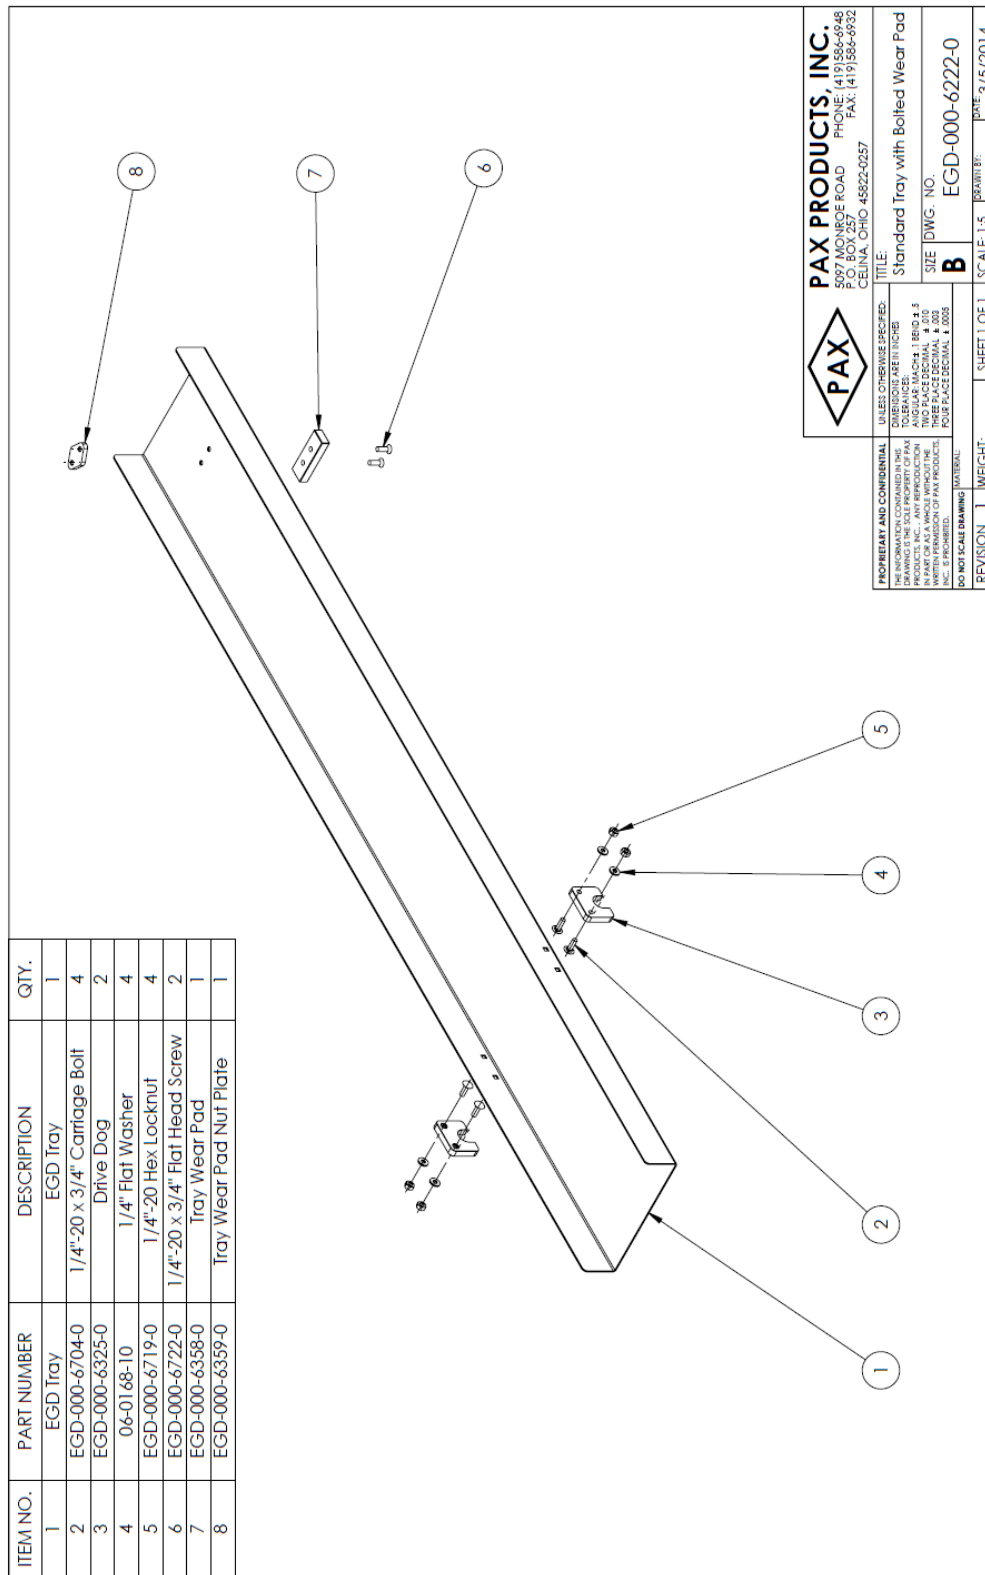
EGD-000-6222-0 STANDARD TRAY WITH BOLTED WEAR PAD
